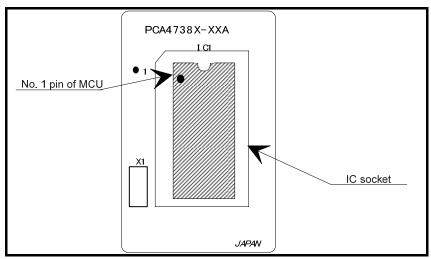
Mounting an MCU (adapters with DIP type IC socket)
